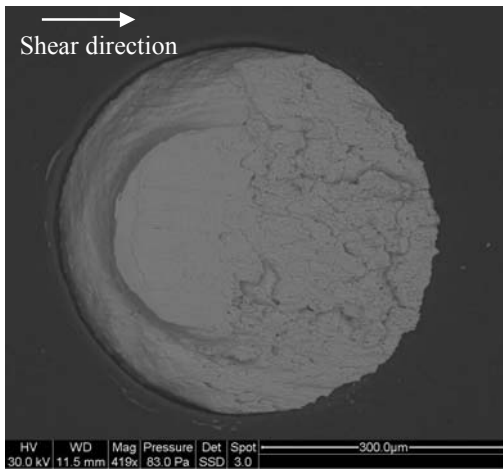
Failure site of a non-reballed 676 I/O BGA with SAC solder balls
